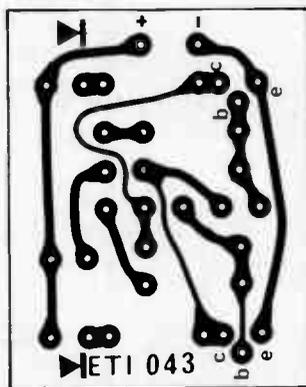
Printed circuit board layout – full size 40 x 50 mm.
